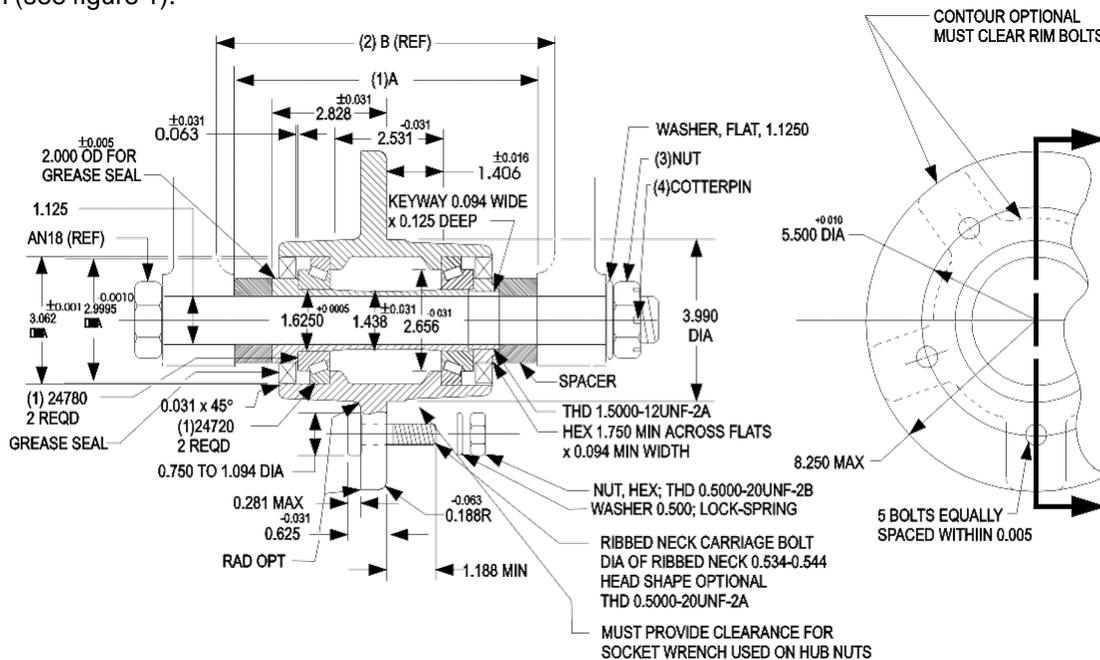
Hub assembly, fork mounting for 6.00-9 and 7.50-10 wheels.
